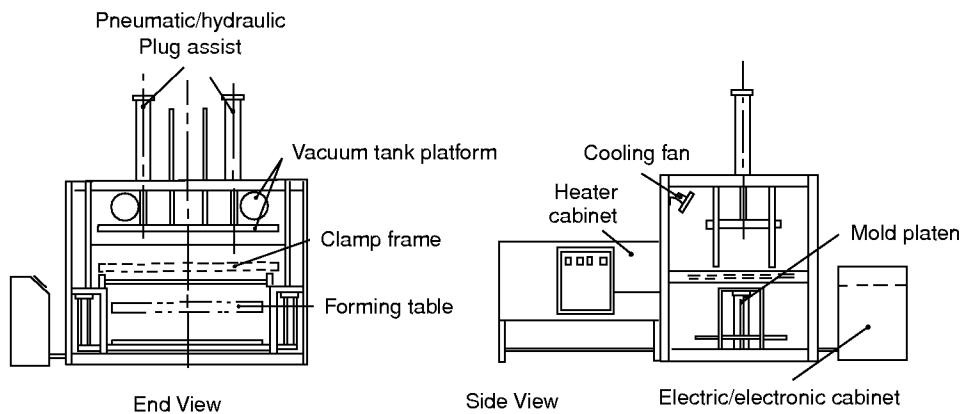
Schematic of heavy-gauge shuttle thermoforming machine (Drypol/Zimco, no-longer in business) (14). Used with permission of Hanser Publications.
